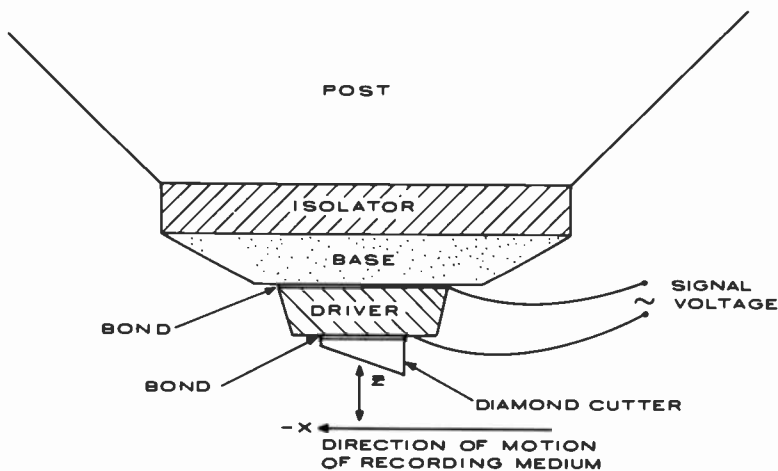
A schematic drawing of the cross-section of a cutterhead.
